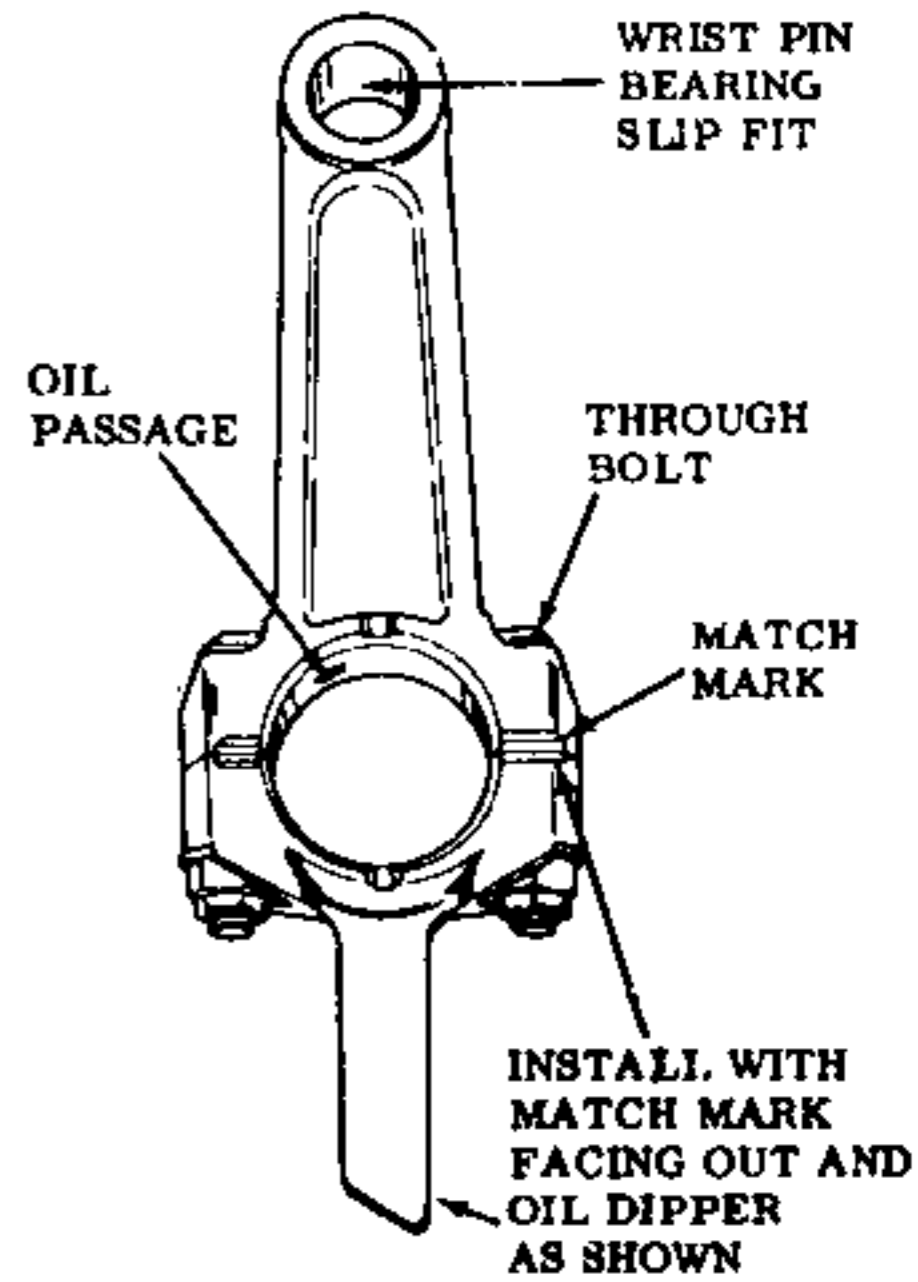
Connecting rod assembly used on Models HH80, HH100 and HH120.
